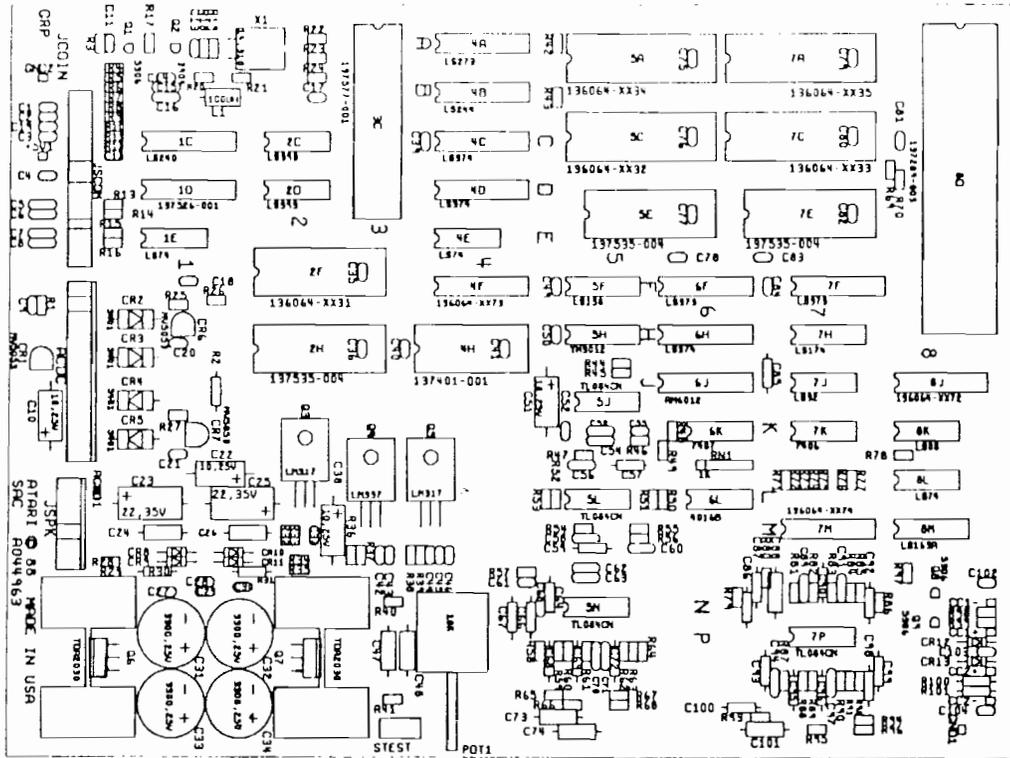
SAC (Sampled Audio Cruncher) PCB Assembly
